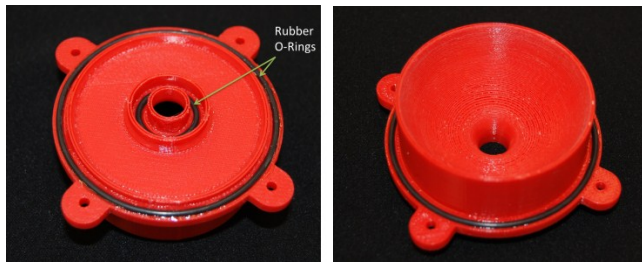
Middle Seal with rubber O-rings (Left: Top view; Right: Bottom view).
